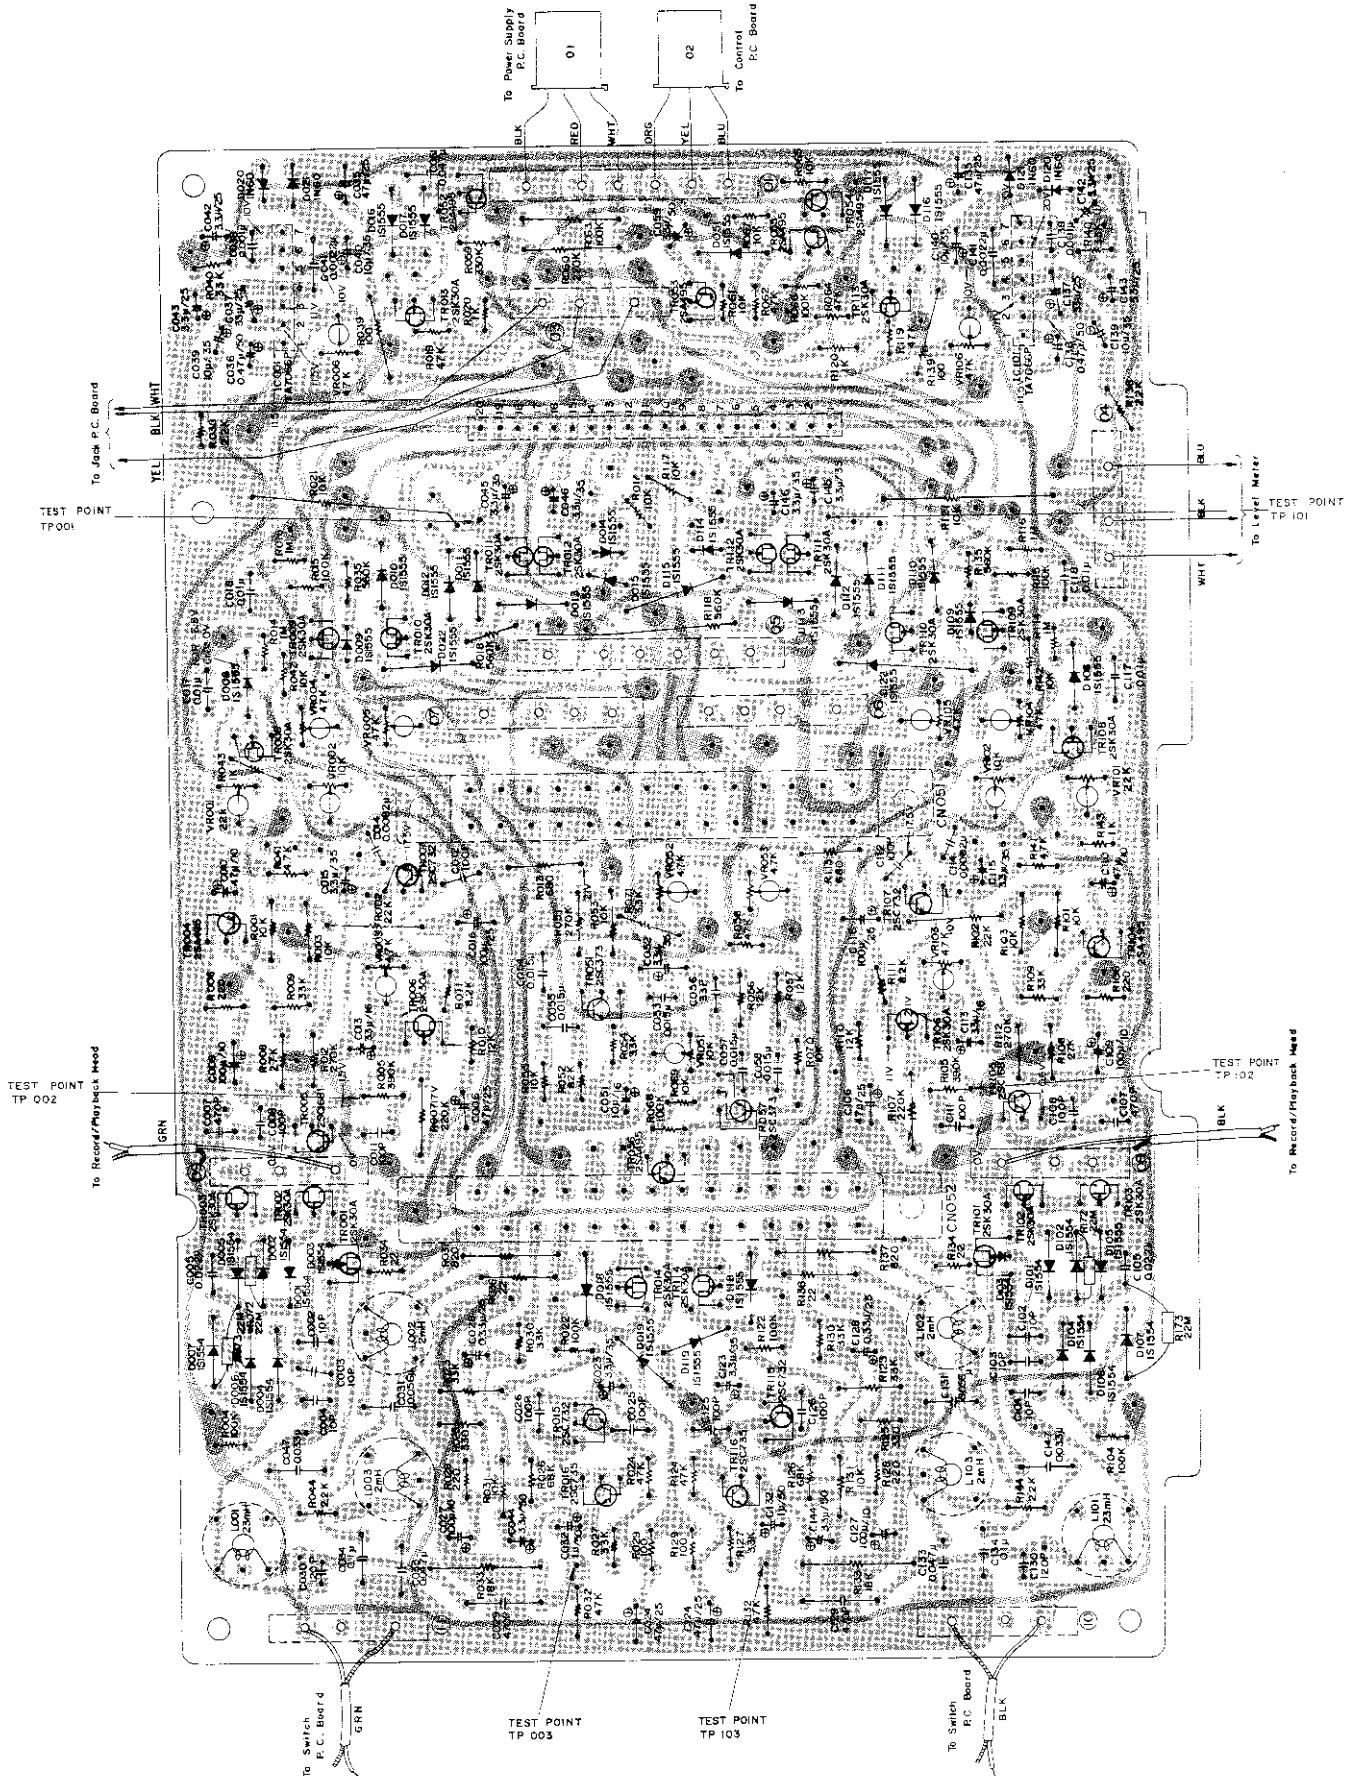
Bottom View of Pre-amplifier P.C. Board, PC-001
